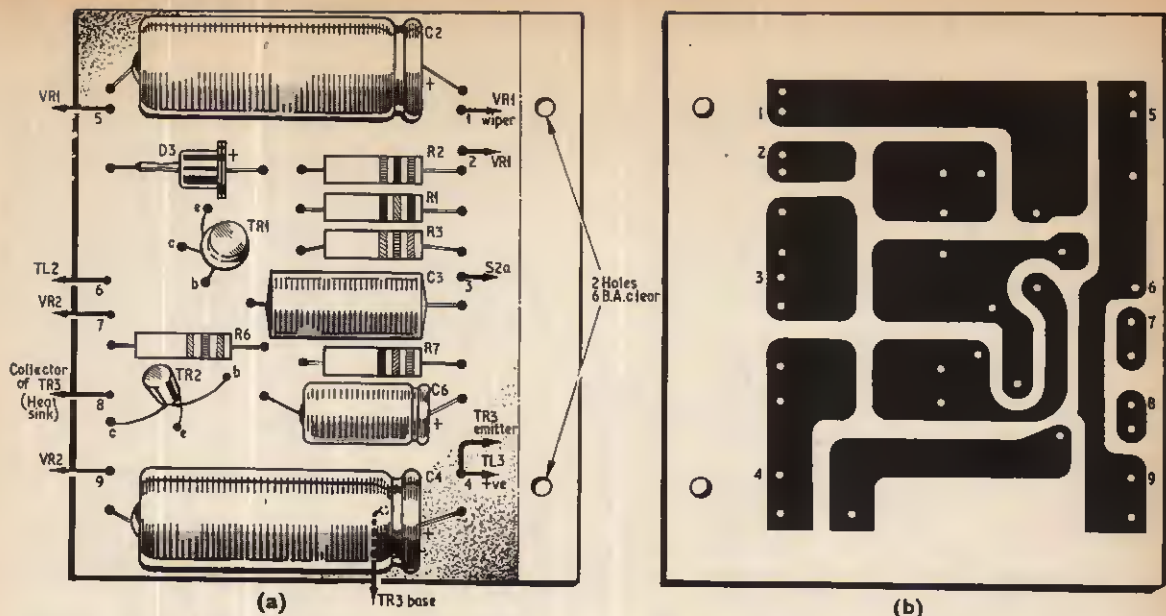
Printed circuit board. (a) arrangement of components on plain, insulated side of board. (b) full size pattern on copper clad side of board
